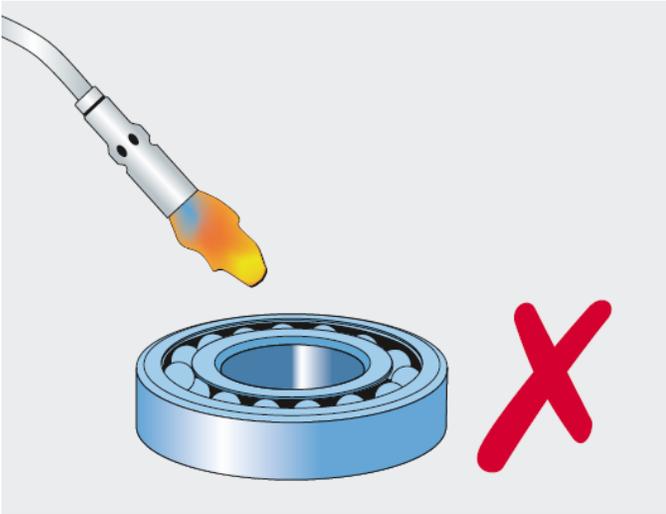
Torches should never be used to heat bearings since ring damage will occur (Courtesy of SKF, 2011, *SKF Maintenance and Lubrication Products*, © SKF Group)
